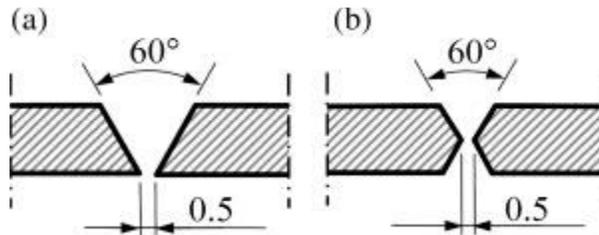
Geometries of weld grooves (y-z plane). (a) Single V-weld groove. (b) Double V-weld groove.
